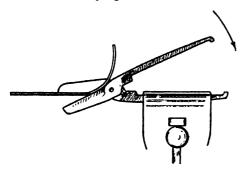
Shears Mounted in a Vice for Cutting Metal
